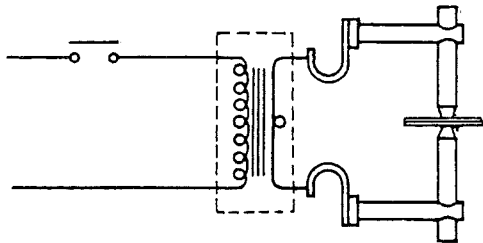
Typical single phase spot welding circuit [1].
